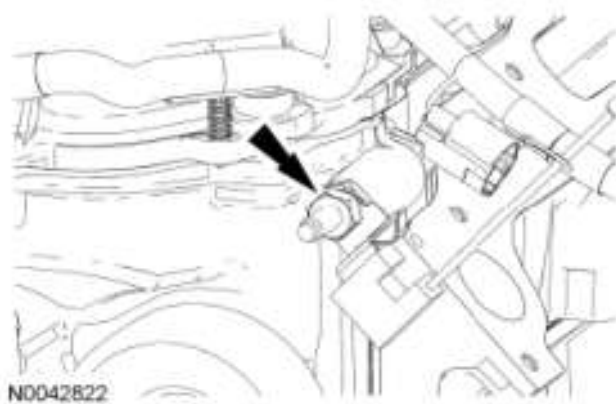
Locating Cylinder Head Temperature (CHT) Sensor Electrical Connector
